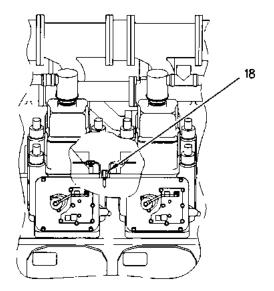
Engine Mounted Sensors Right Side View (18) Inlet air temperature sensor.
